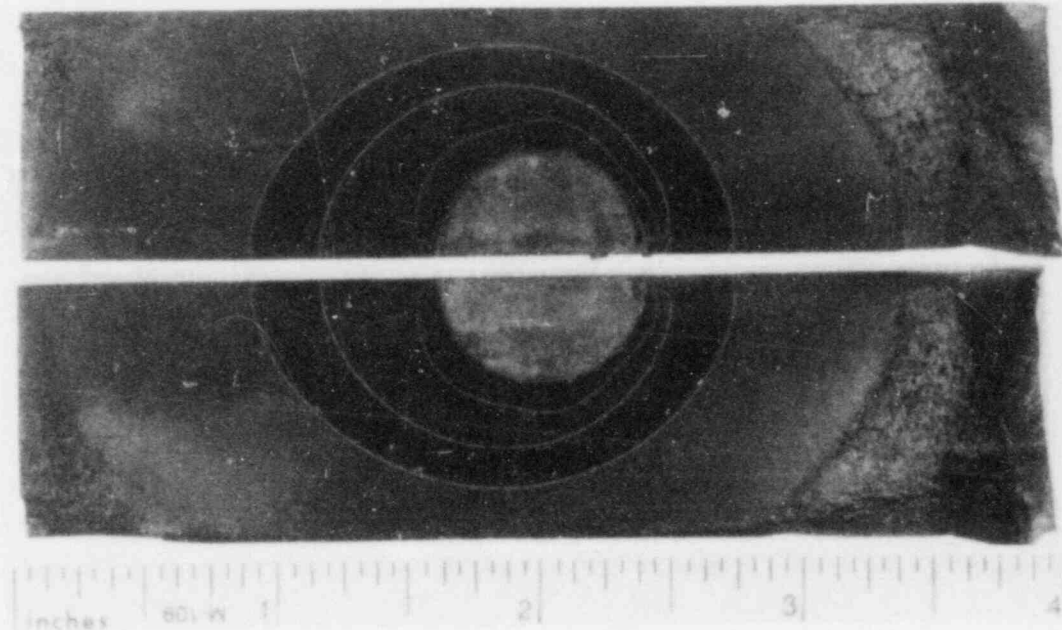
Beachmarks on a part-through crack test specimen of A 533-B tested at 288°C.
